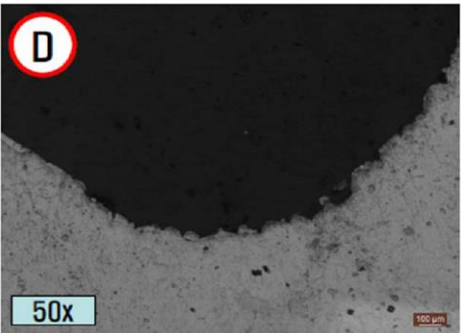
Magnified View of Fillet Region Between Impeller Blade and Shroud
